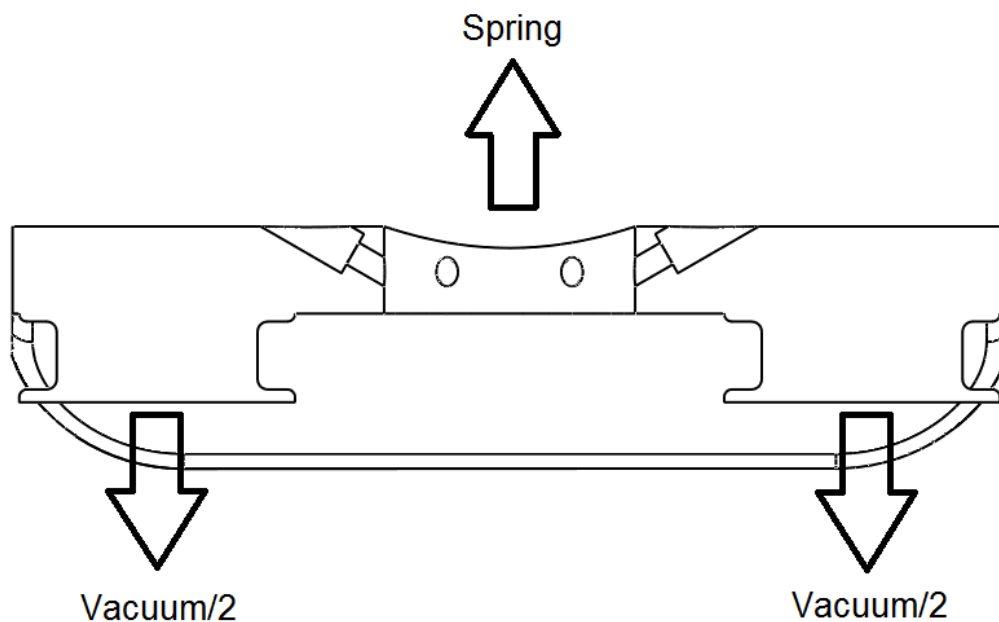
8: Force balance of vacuum and spring forces on the sensor plate..
